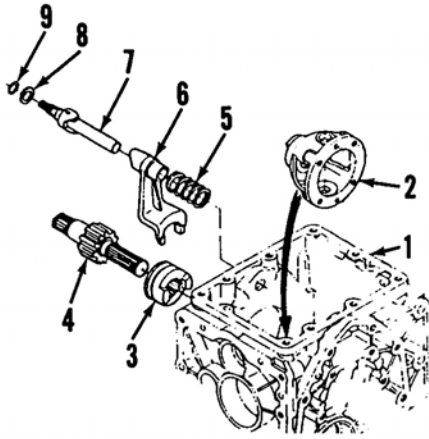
Exploded view of differential lock assembly typical of the type used on all models.
